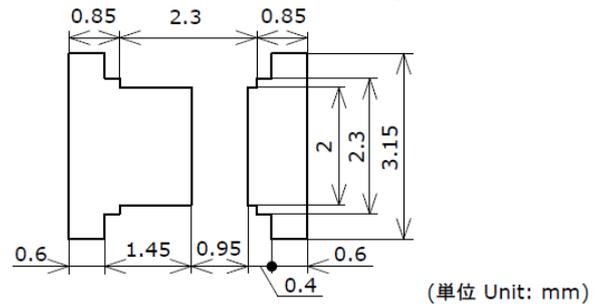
Recommended soldering pad pattern and recommended metal solder stencil aperture (example: part number NFSW757H-V1 Specification)
